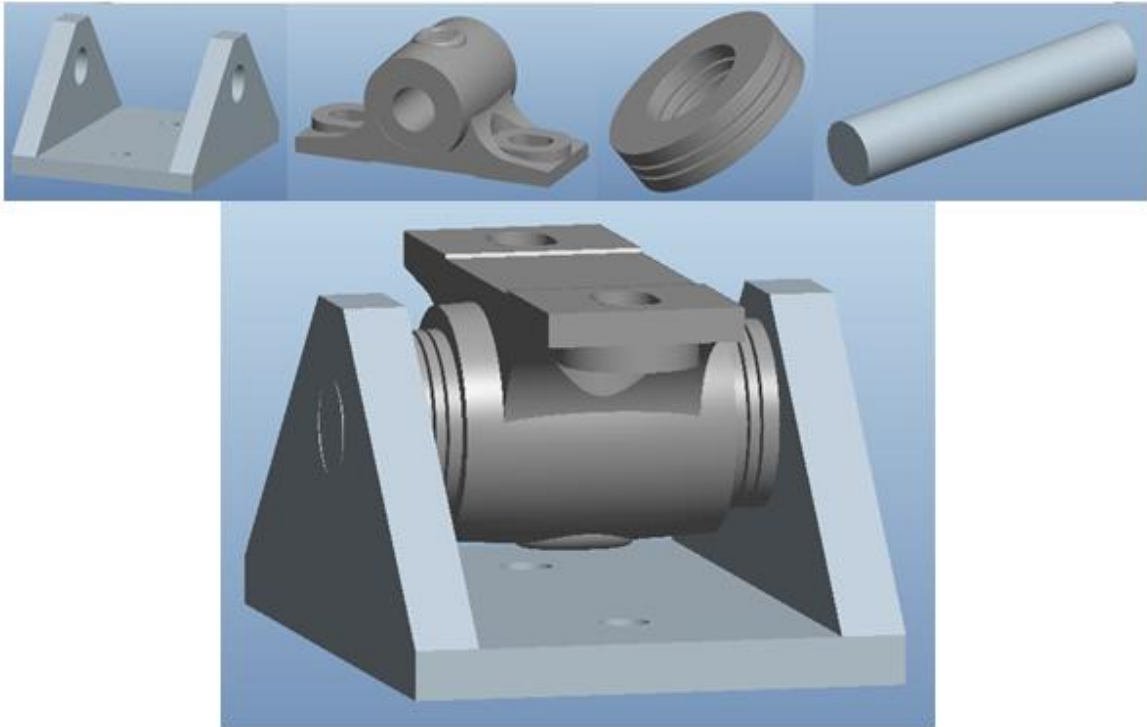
New low-friction pivot; the upper row, left to right, shows the custom-made aluminum housing, the solid bearing, the thrust bearing, and the central rod. The bottom picture shows all the components assembled to create the low friction pivot for the balance board.
